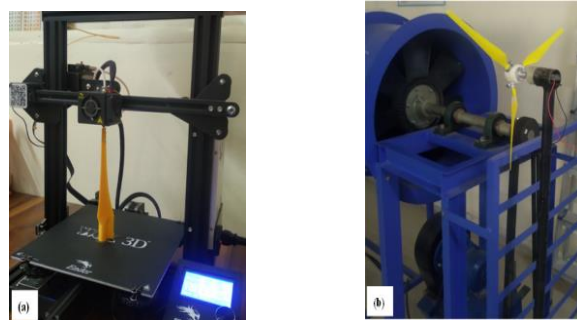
Fabrication and testing of blade (a) Blade fabrication (b) Wind Tunnel test setup
